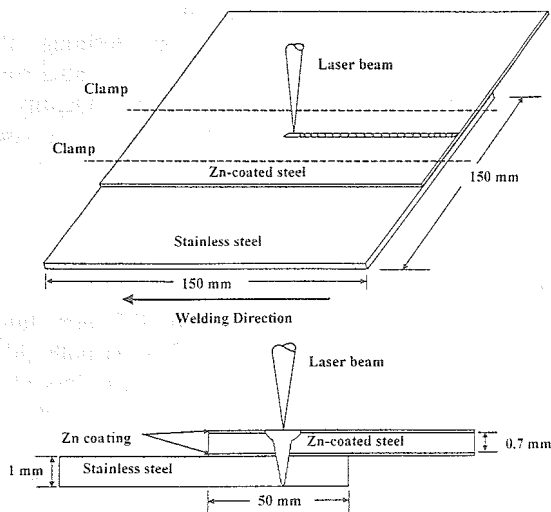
Configurations of the used laser lap weld specimen
